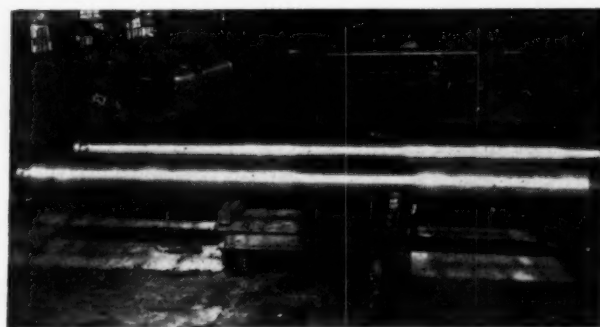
FINISHED MACHINED LINE AND TAIL SHAFTS FOR COAST GUARD CUTTERS
